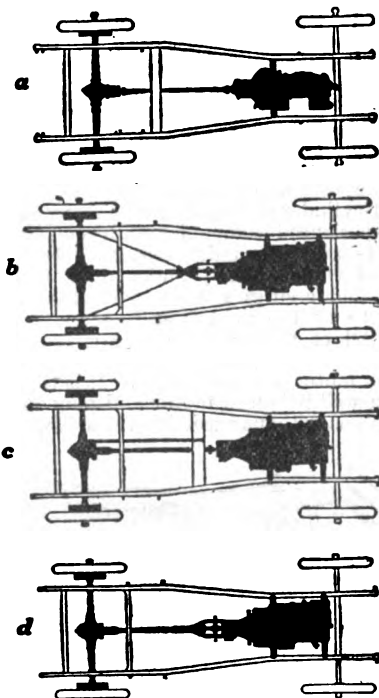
Types of drive: a Hotchkiss simple and light, giving drive and torque through rear springs; b drive by torque tube and radius rods strengthened by yoke; c drive by torque beam fastened to rear axle and a frame member; d typical torque tube and yoke drive. (Oakland Motor Co.)
